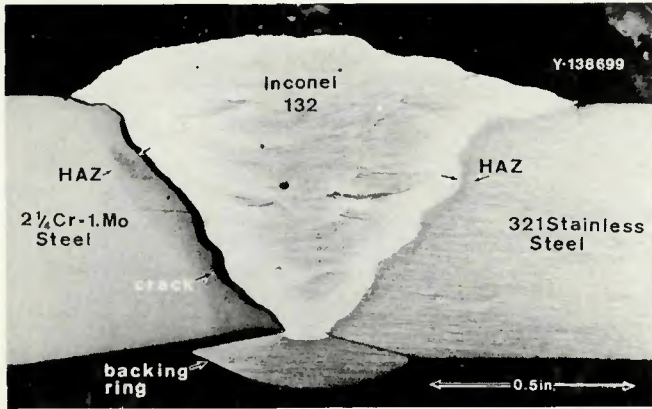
Typical failure found in ferritic steel to austenitic stainless steel transition weld joints
